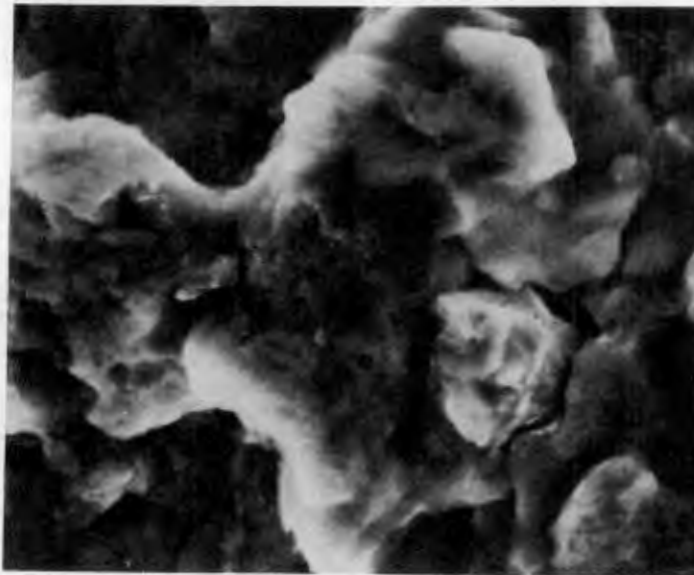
Fracture surface at primary initiation site showing intergranular fracture (Reference 2). Mag. 1500X
